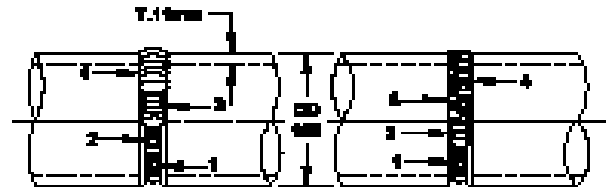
Welding Sequence in 5G Down Hill Position
